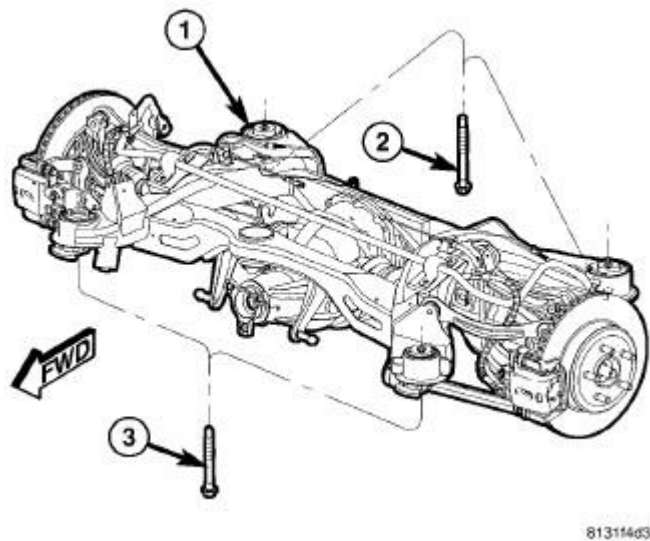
REAR CROSSMEMBER MOUNTING BOLTS
